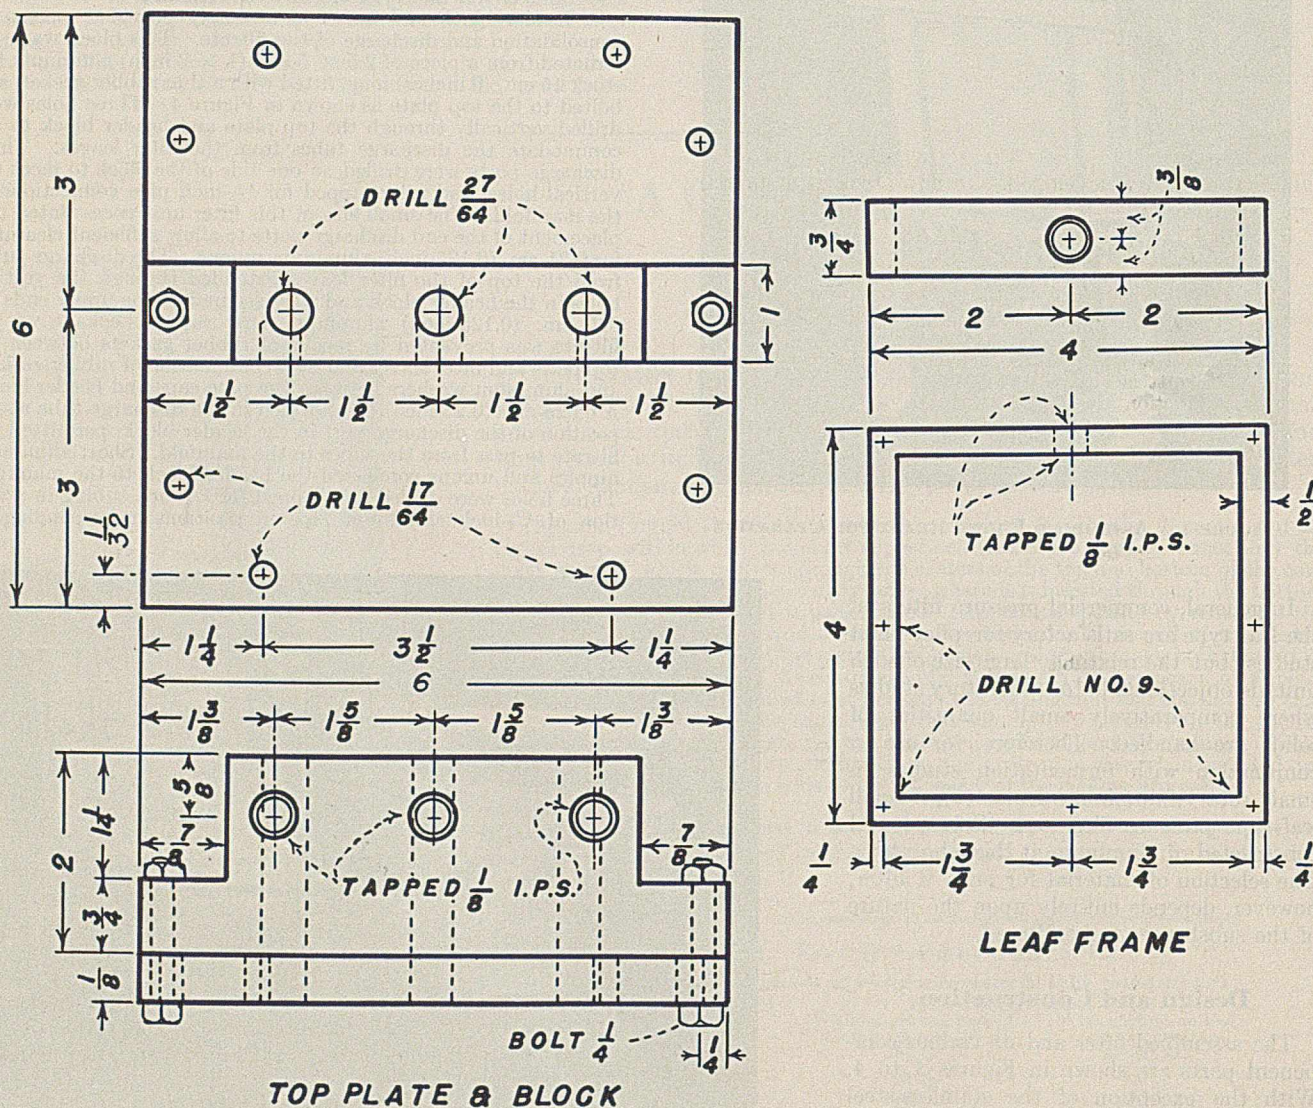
DETAILS OF TOP PLATE, HEADER BLOCK ASSEMBLY, AND LEAF FRAME FOR FILTER
